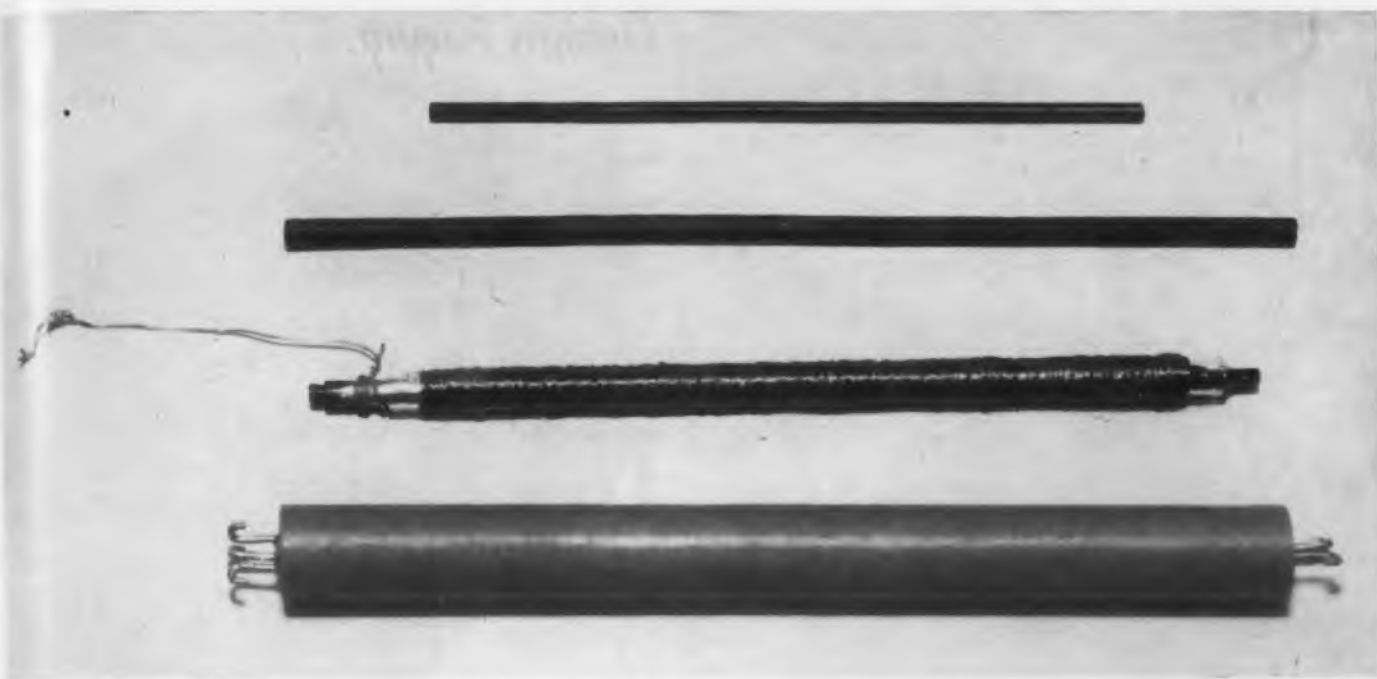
Ferrite delay construction is illustrated by these elements. From top to bottom the pieces are: rod with solenoid winding, ferrite tube, assembled line with modulation winding and final encapsulation.
